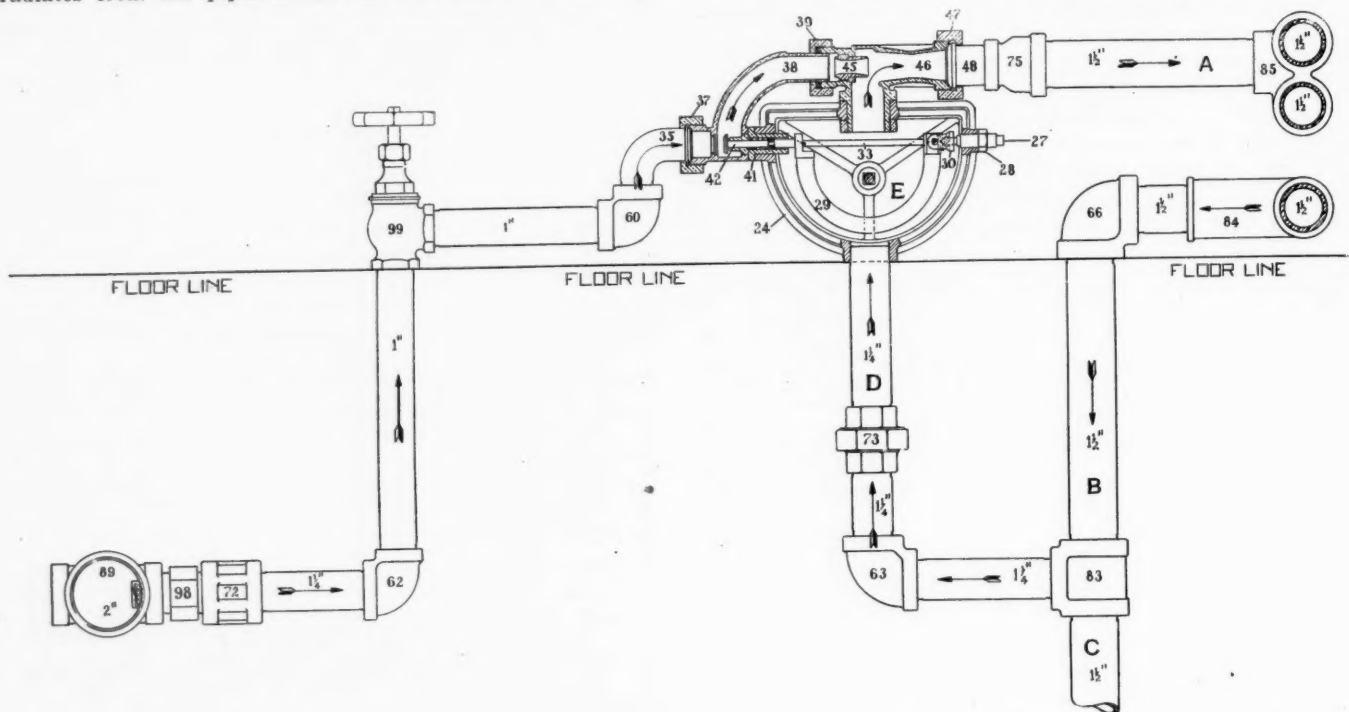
Elevation of Car Piping, Showing Section Through Unotherm.
